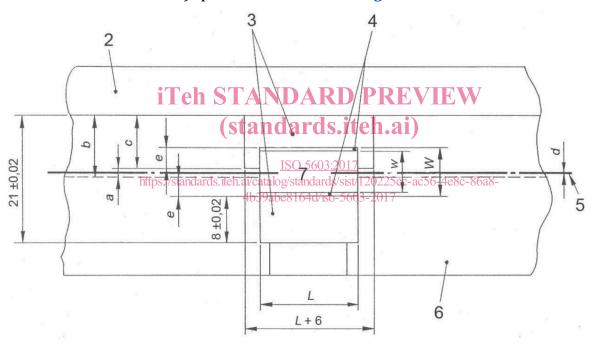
Layout of a second type of semi-follow-on mould and its extraction tool for method 1
